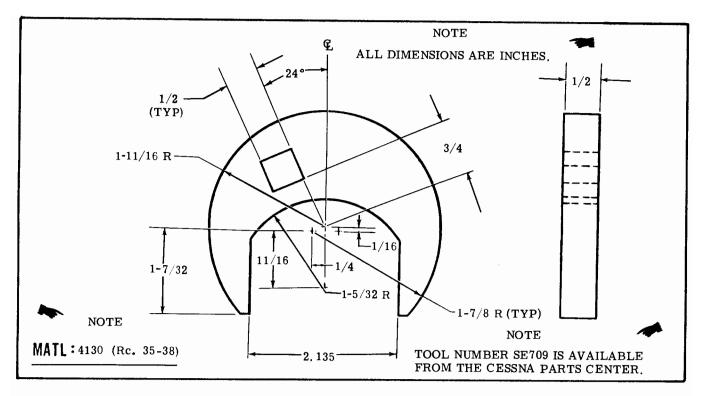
Oil Filter Adapter Wrench Fabrication
